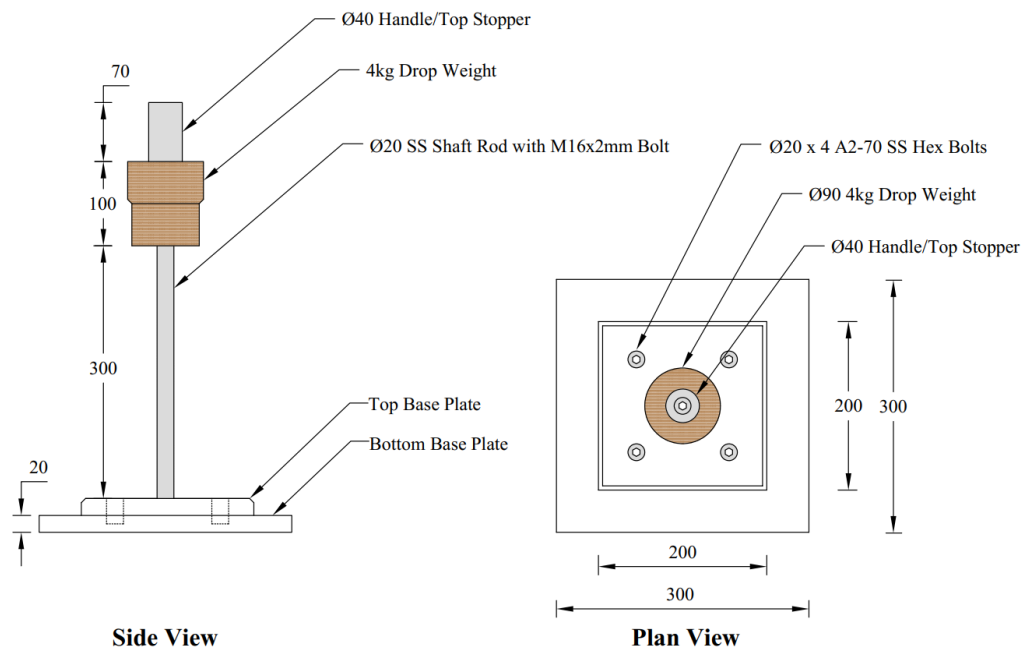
Schematic view of hand tamper (or drop weight) compactor (all dimensions in mm).
